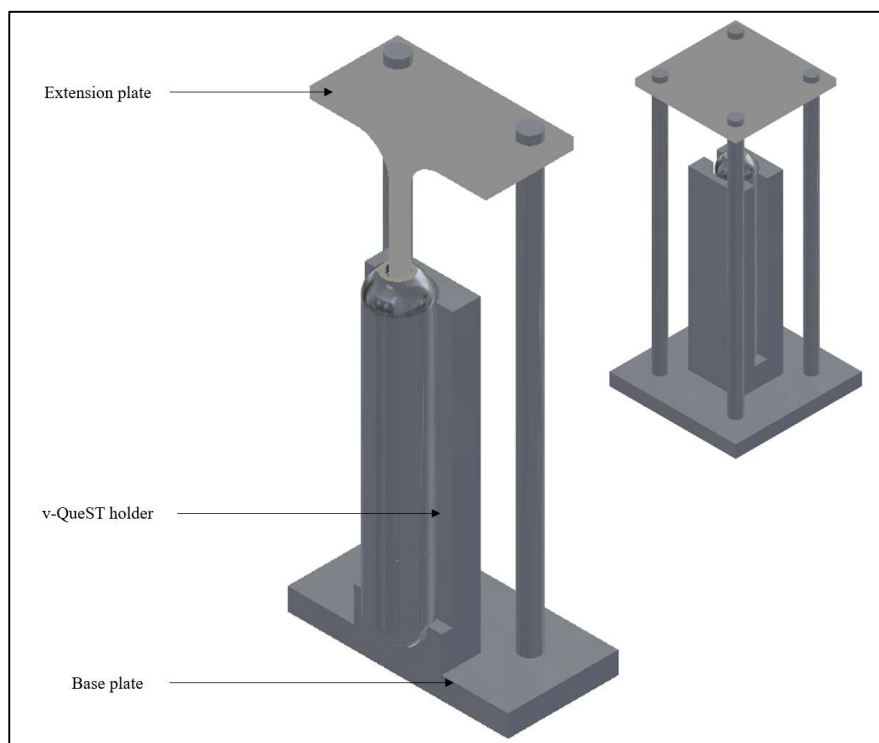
The v-QueST custom test rig. The v-QueST is embedded in a custom holder with a base plate and four cylindrical tubes 3D printed in PLA. The tubes fit into a corresponding recess in the extension plate. When a load is placed on the extension plate, it can freely move down the cylindrical tube, mitigating any load dispersion to the base plate.
